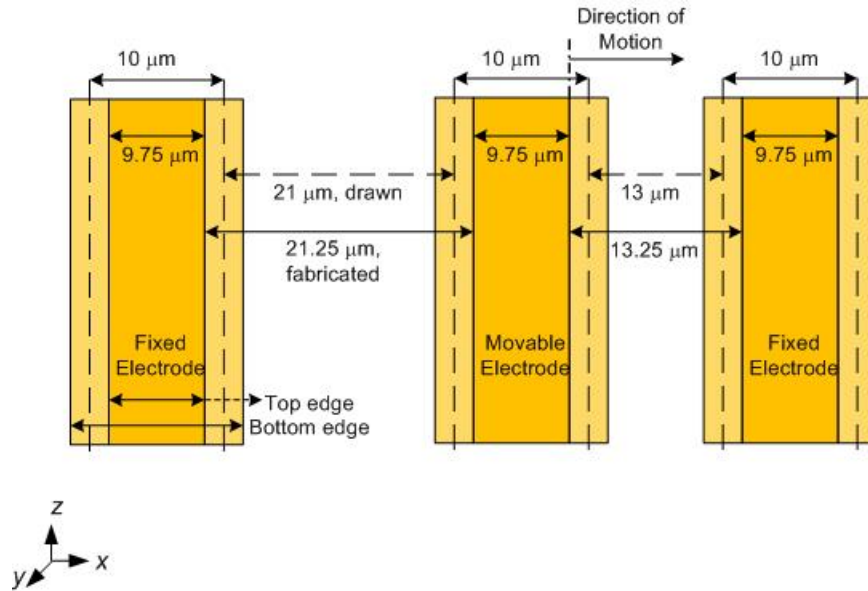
The above schematic depicts the top view of the movable and fixed electrodes. The dashed edges are the drawn mask dimensions and the solid edges are the fabricated switch dimensions.
